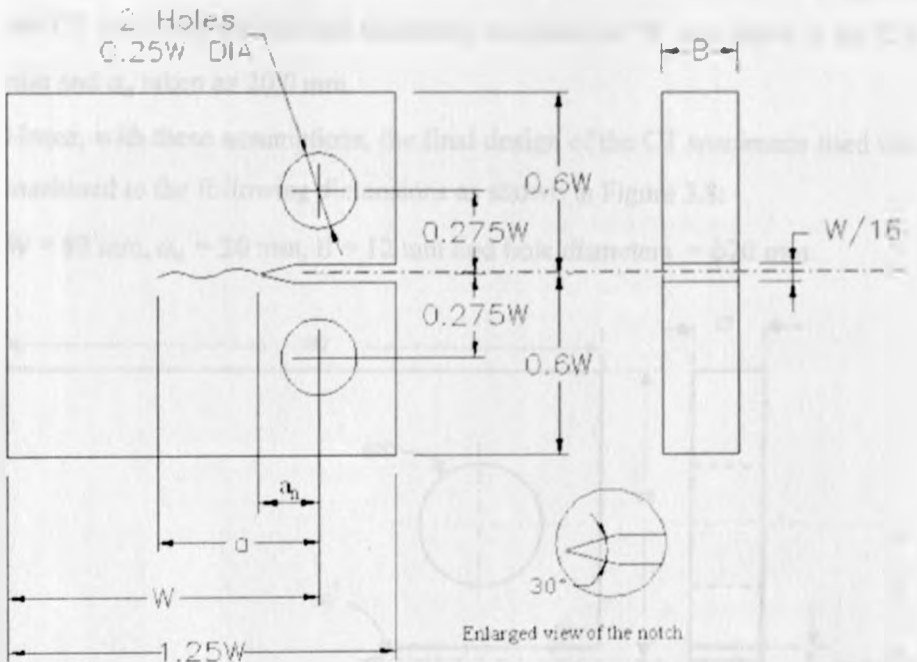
Schematic and dimensions of a Compact Tension (CT) specimen
